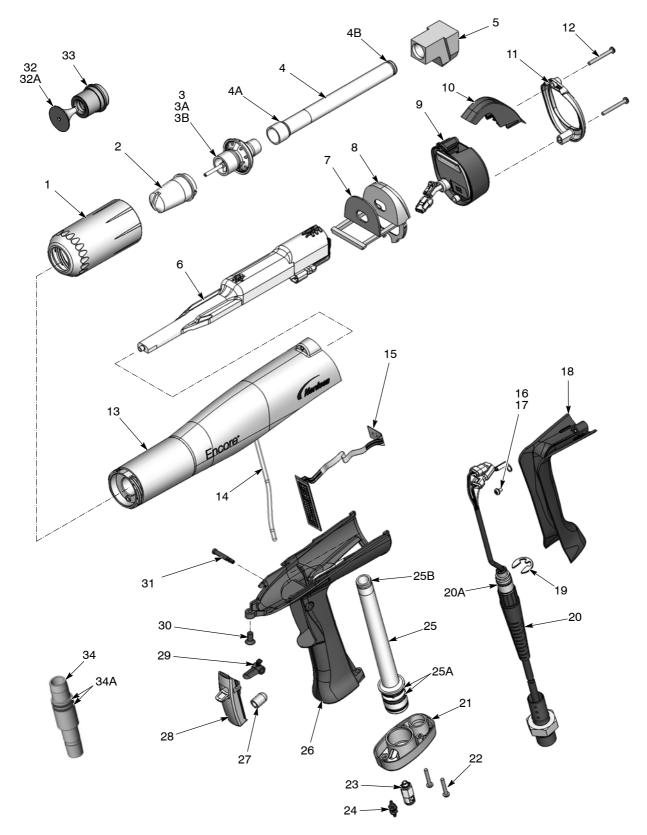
Exploded View of Encore XT Manual Spray Gun and Accessories
